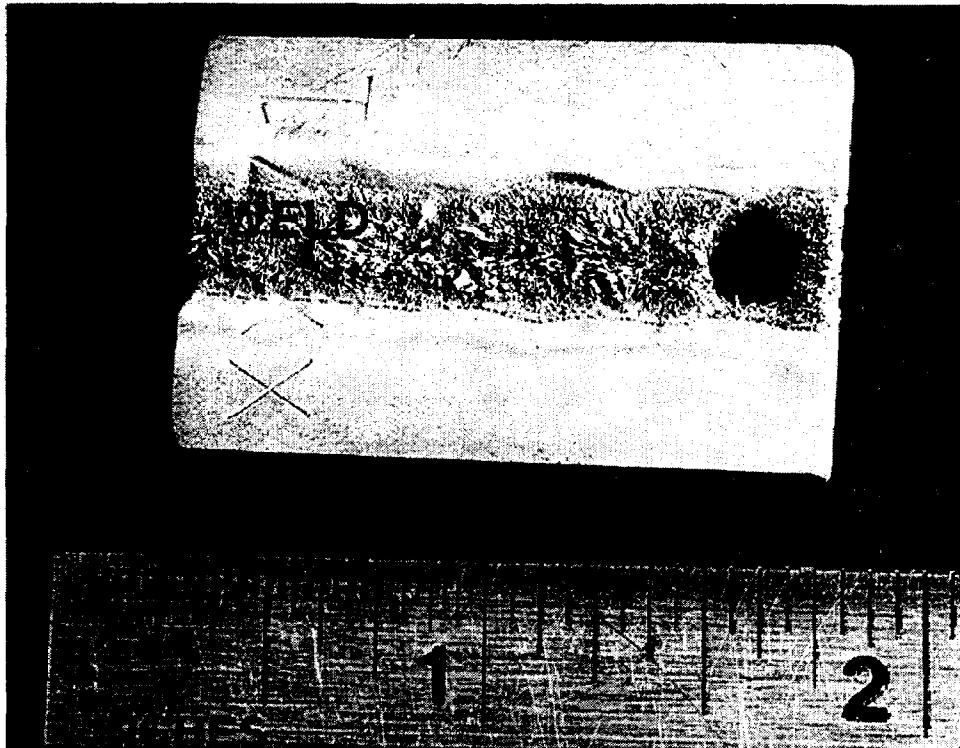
Galvanic Corrosion, Accelerated Weld Metal Corrosion of Inconel 690
